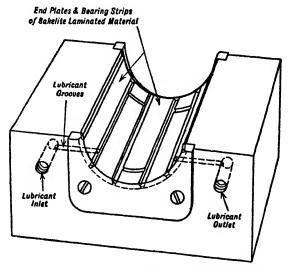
HEAVY-LOAD BAKELITE LAMINATED BEARING CONSTRUCTION
